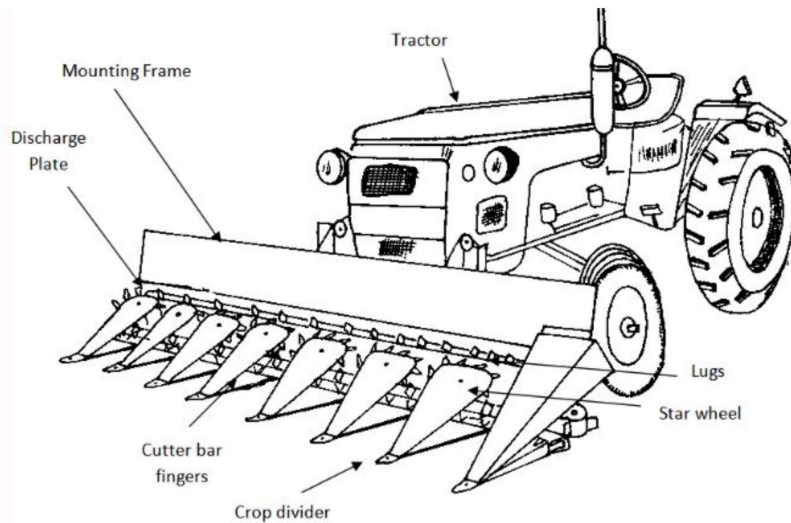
Tractor front mounted vertical conveyor reaper windrower.
